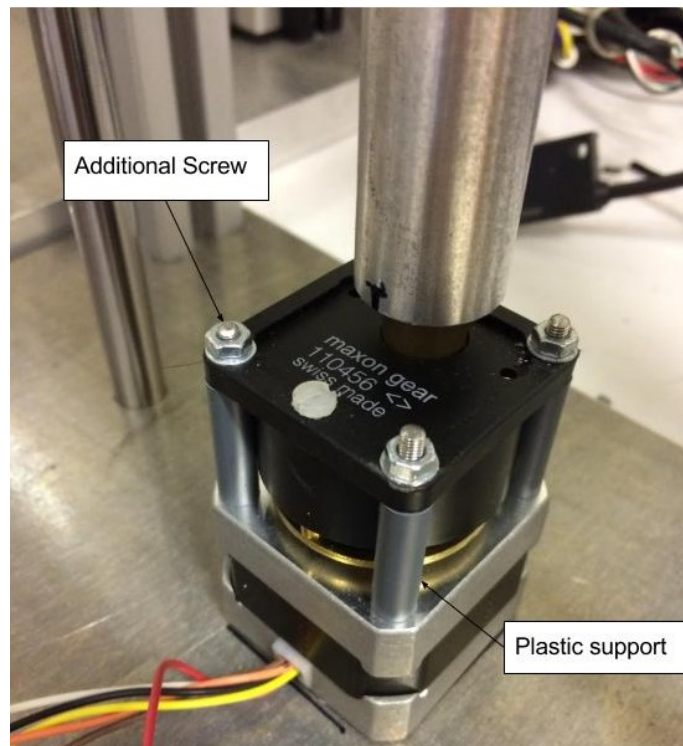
Added in additional screws and plastic supports to gear box attachment.
